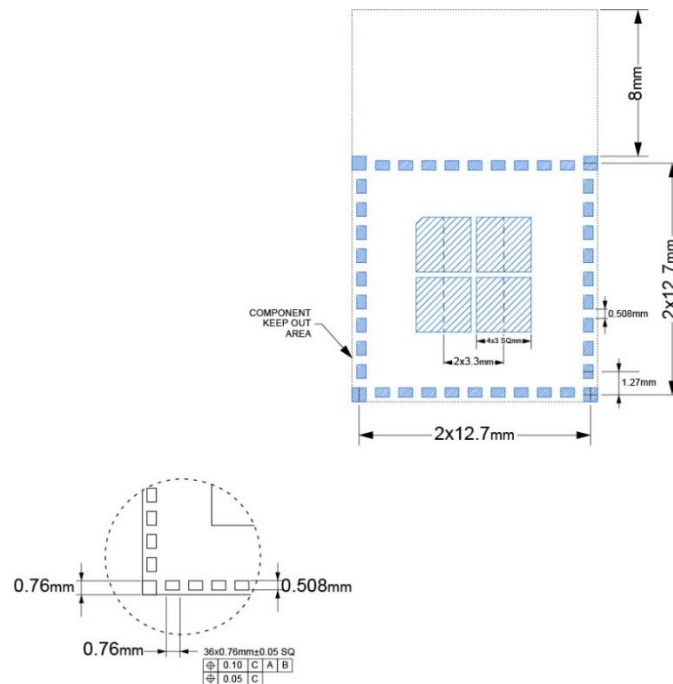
CQM730-0-50-2B PCB Landing Pattern
